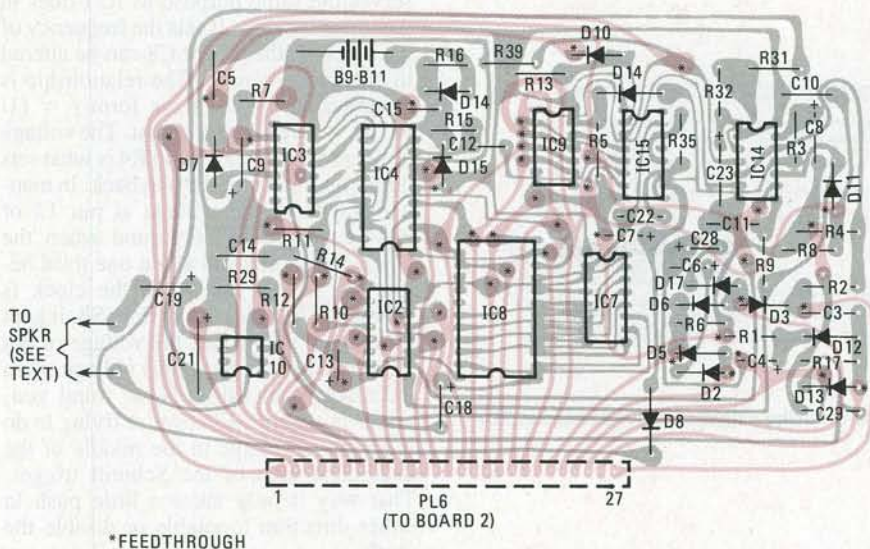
PARTS-PLACEMENT DIAGRAM for Board 1. Note that female header, PL6, mounts on the foil side of the board.
